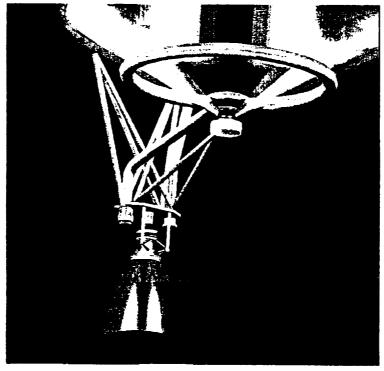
3-Point Engine Mounting (Pinned Joints)
